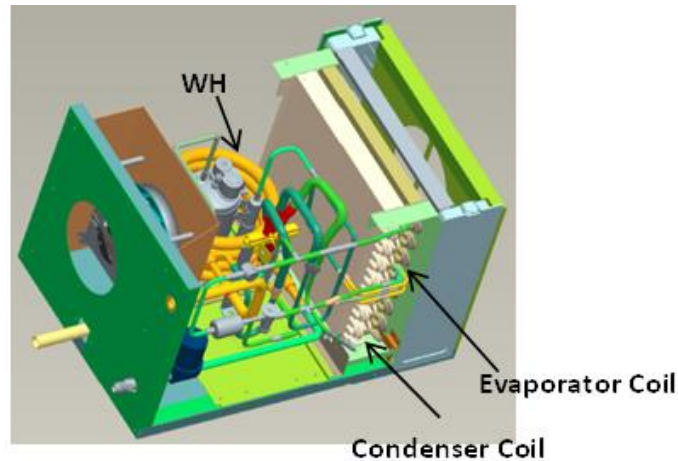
CAD Drawing of prototype WH/DH module layout (Rice et al. 2014).
